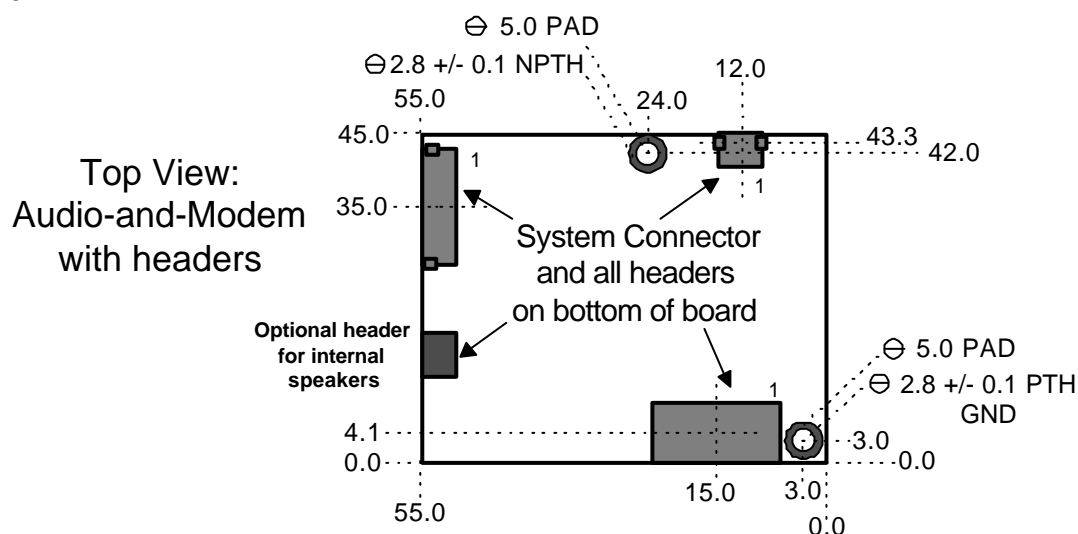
Mechanical dimensions for US/Japan Audio-and-Modem MDC with header
